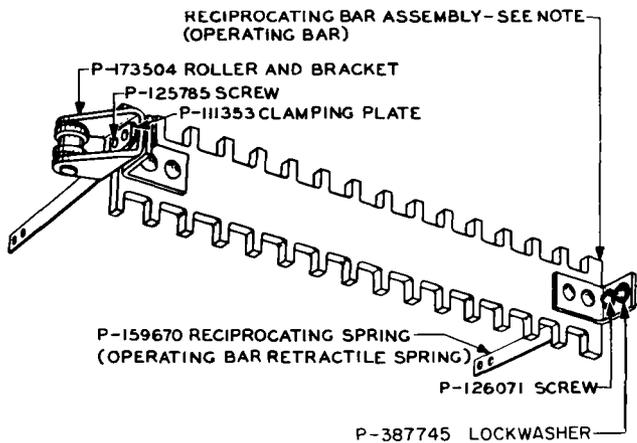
D-85832 Reciprocating Bar Assembly (operating bar)
